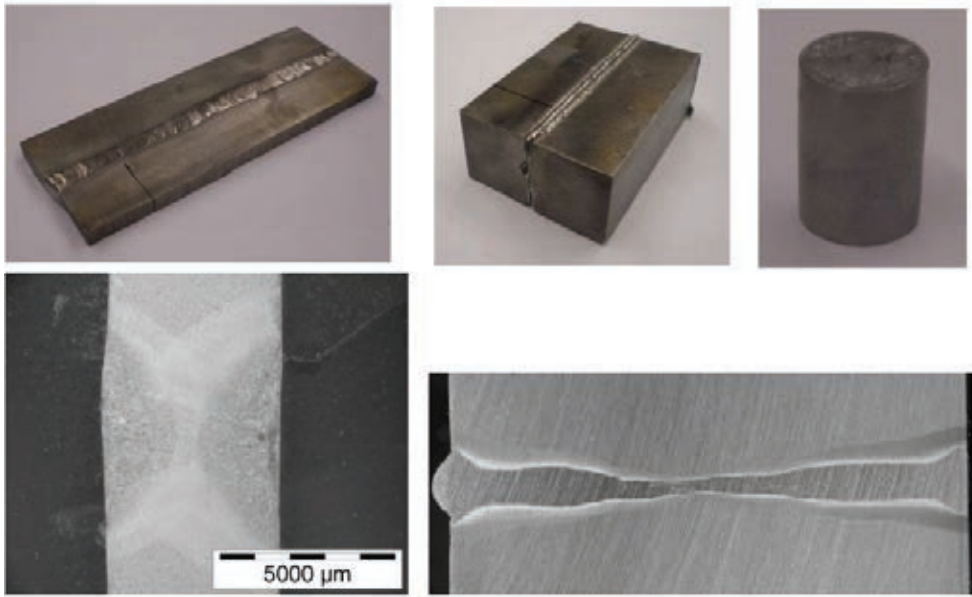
Different EUROFER welds to produce 27 mm, 2 mm Ø LCF specimens. Above: TIG, EB, and diffusion bonding. Below: cross-cuts of TIG and EB weld.
